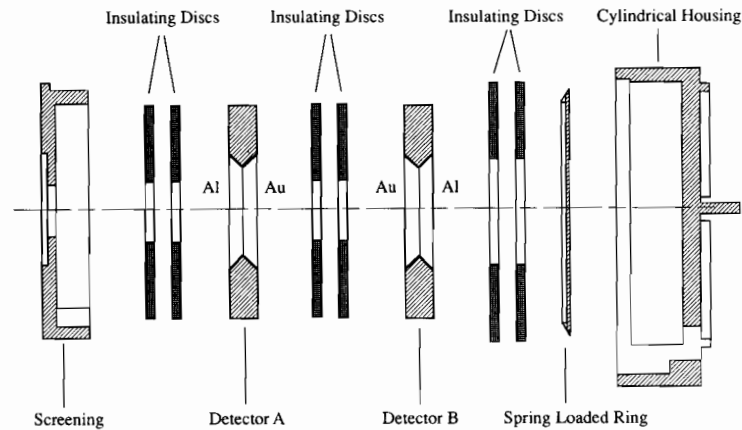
Schematic drawing providing an exploded view of the detector mount.
